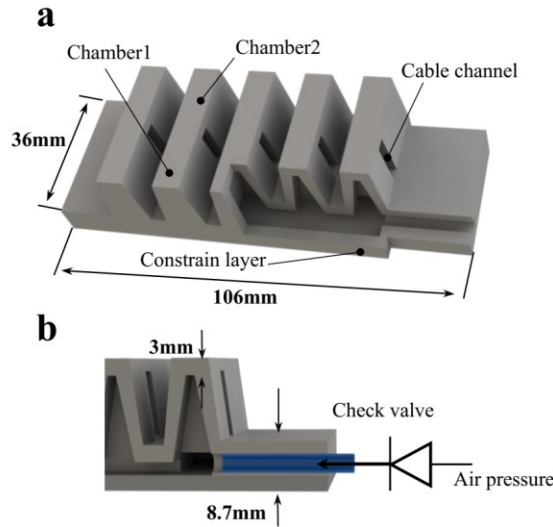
The prototype design of an inflated and sealed soft actuator. (a) The structure of the chambers and cable channels inside this soft actuator. (b) The design of an assembled check valve for on-way sealing.
